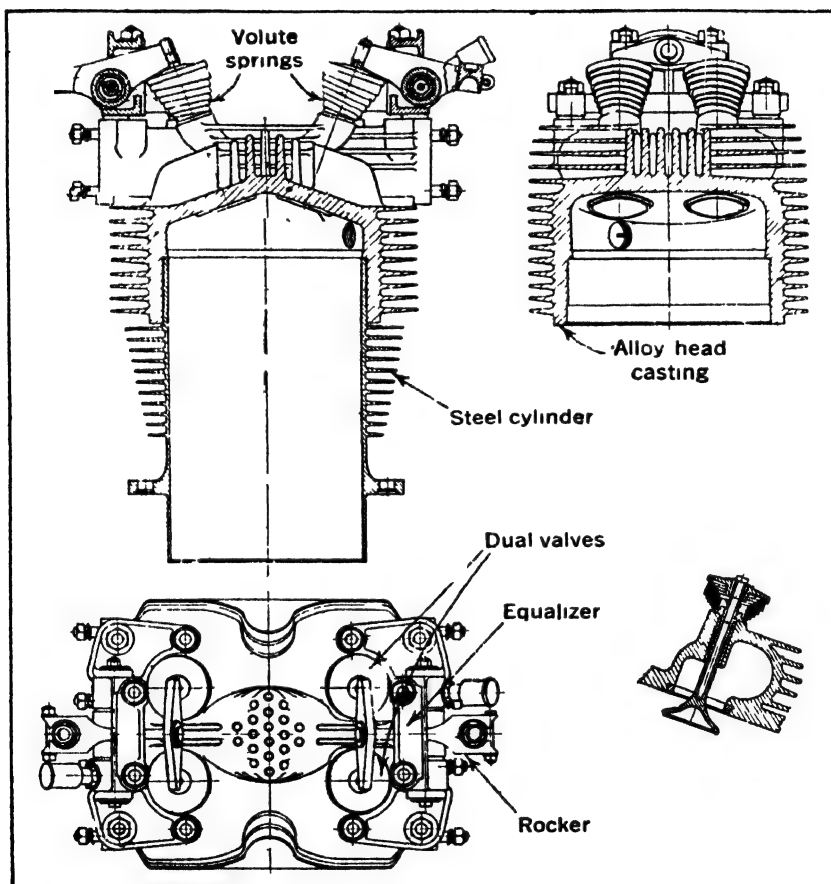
Plan View and Sectional Elevation of the Airco Five and One-Half by Six Inch Roof Head Cylinder, Having Four Valves.
